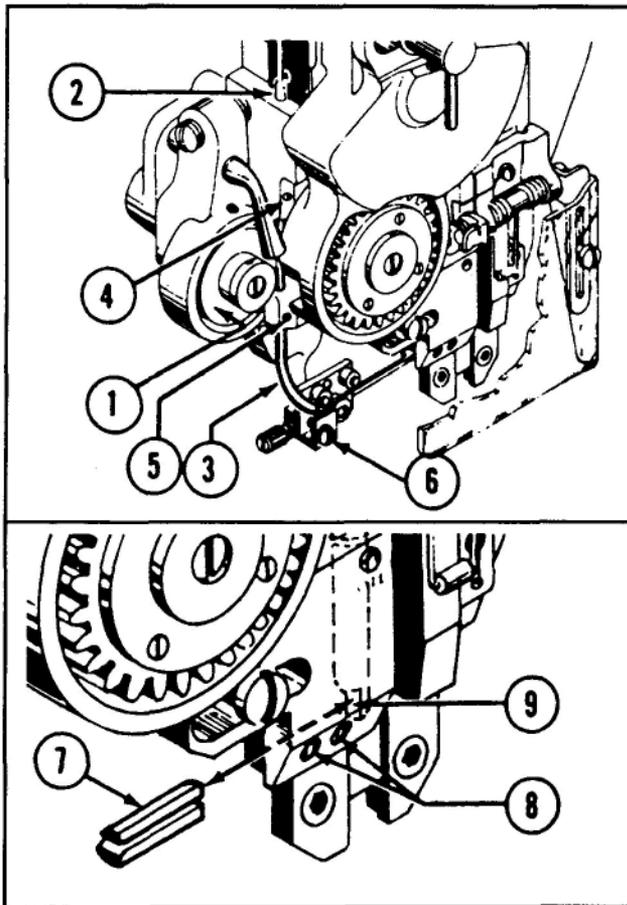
Inspecting Wire Feed Gears, Tubes, and Stationary Cutter
